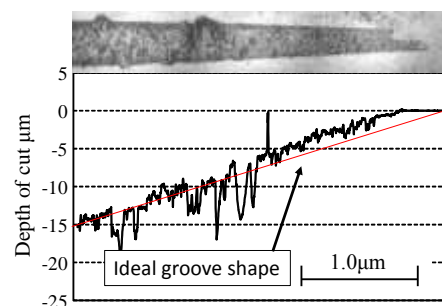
Bottom-surface shapes for a cutting direction of 270° (-30°)
